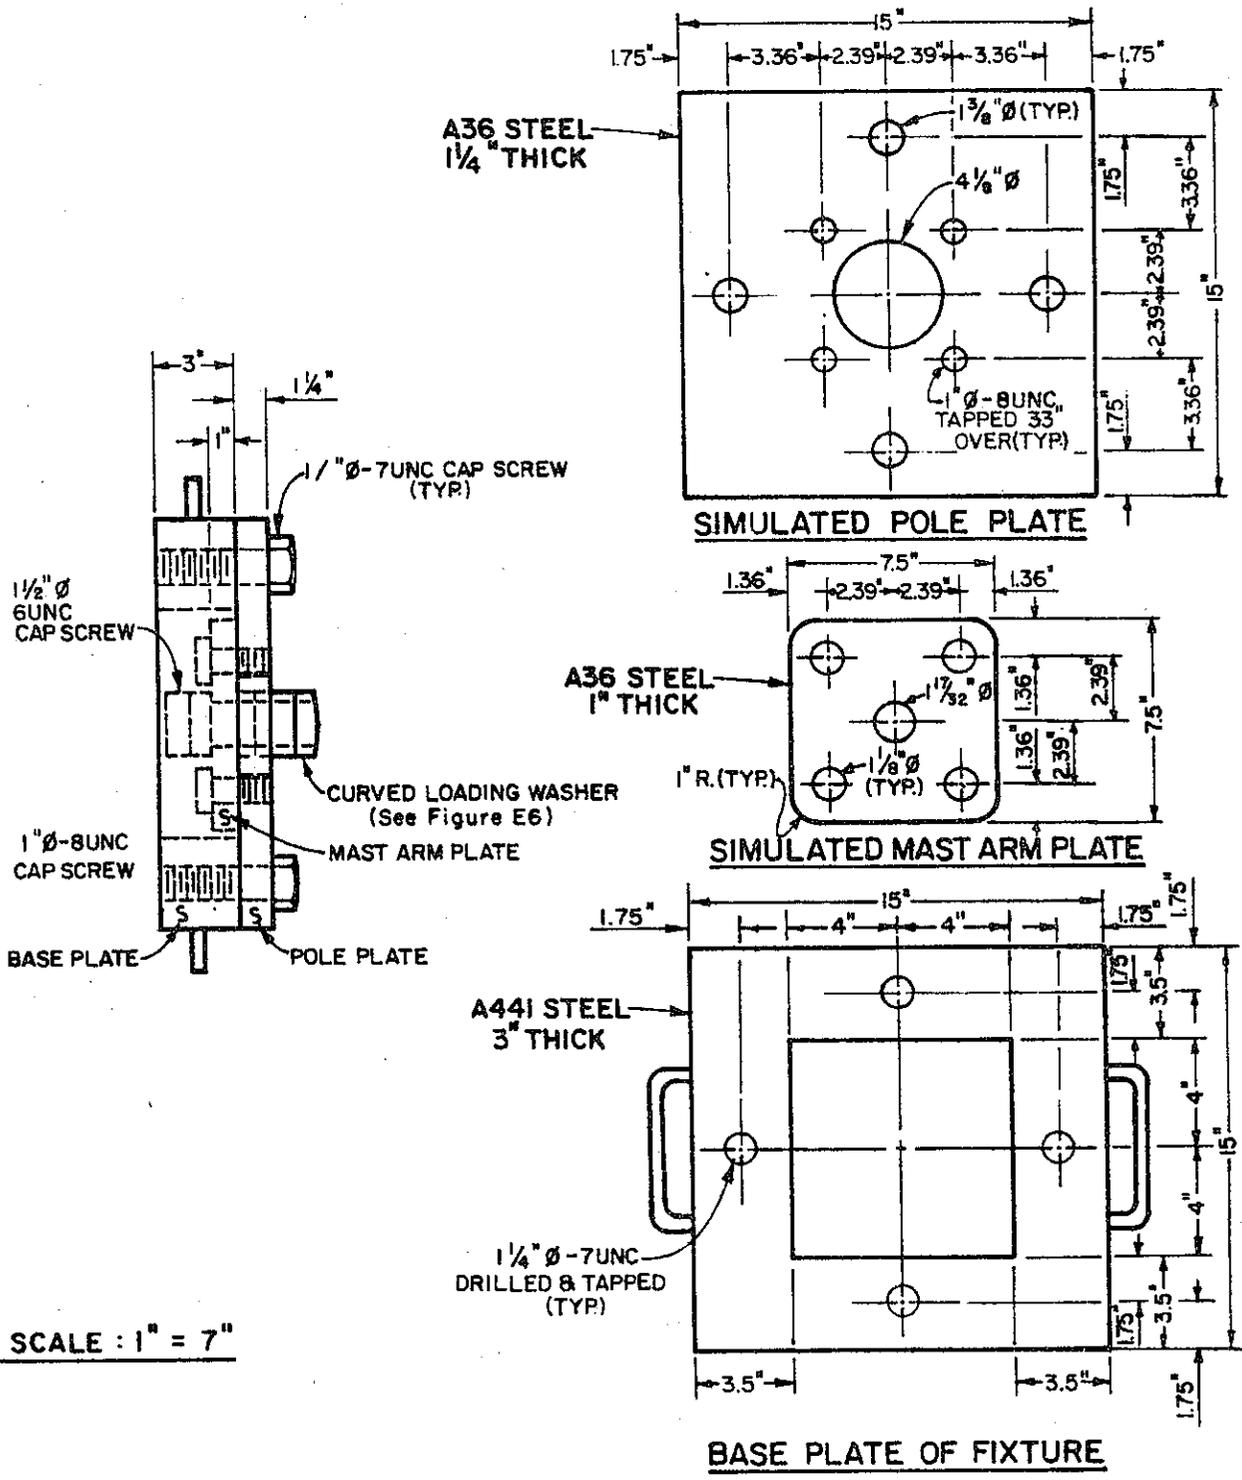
Test fixture for 1" ϕ x 2" ASTM A325 hot-dip galvanized cap screws.
